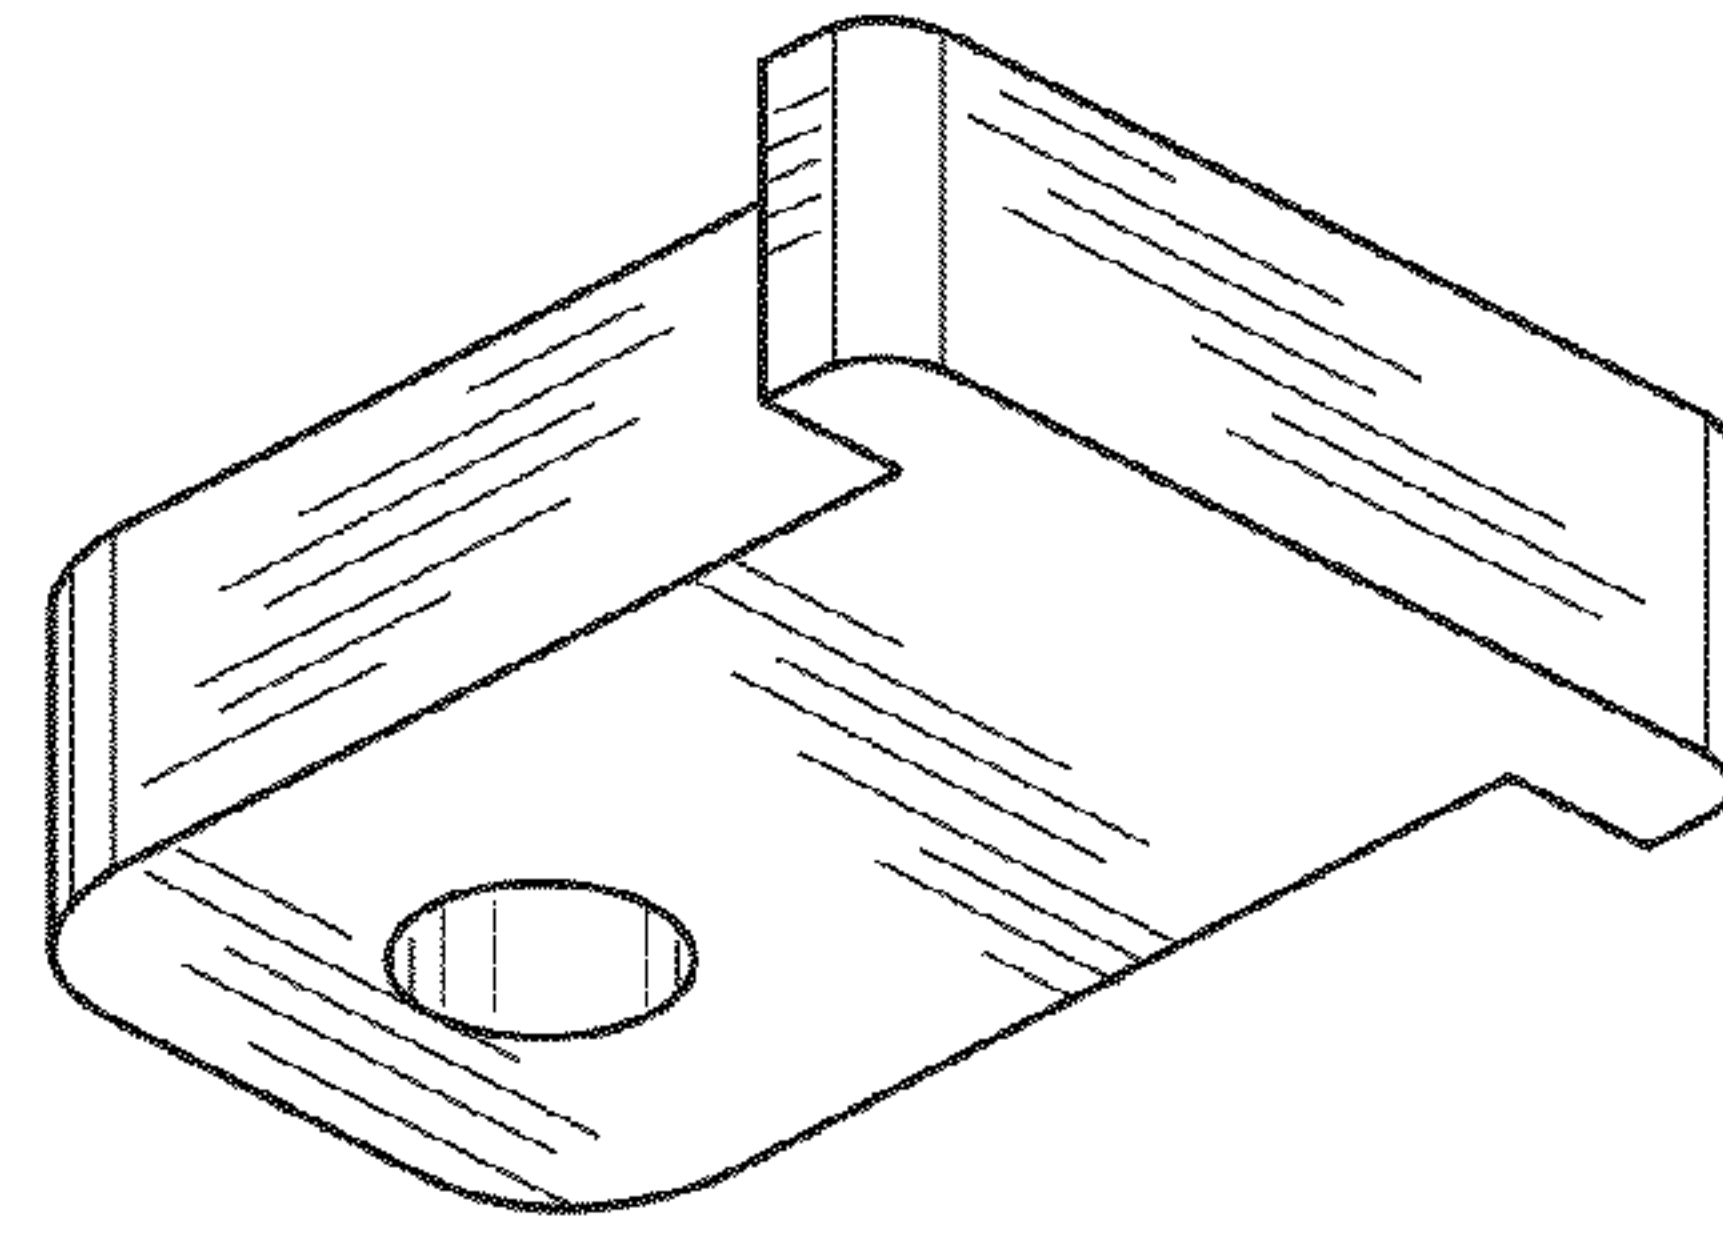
is a bottom view of the connector for reptile cage of FIG. 1.
